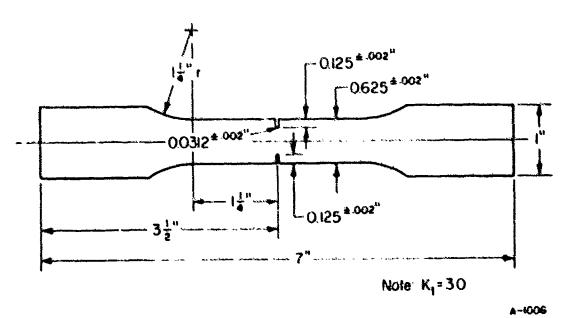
NOTCHED SHEET FATIGUE SPECIMEN
